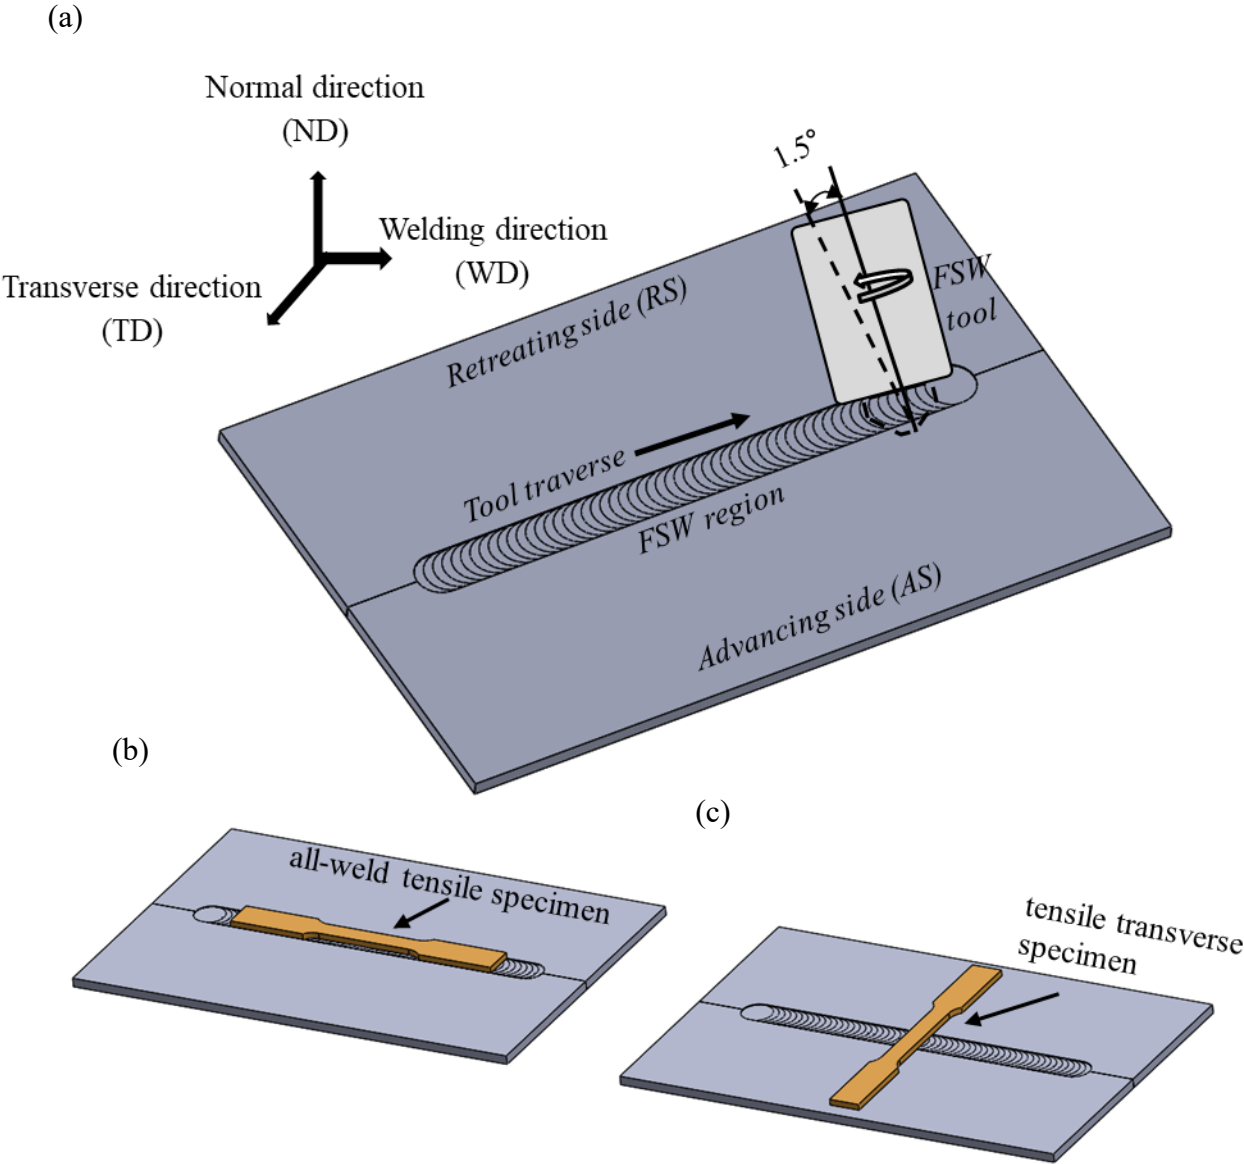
Schematic illustration of (a) butt FSW process of AA6061-T6 sheets, (b) all-weld, and (c) transverse tensile specimen fabrication.
